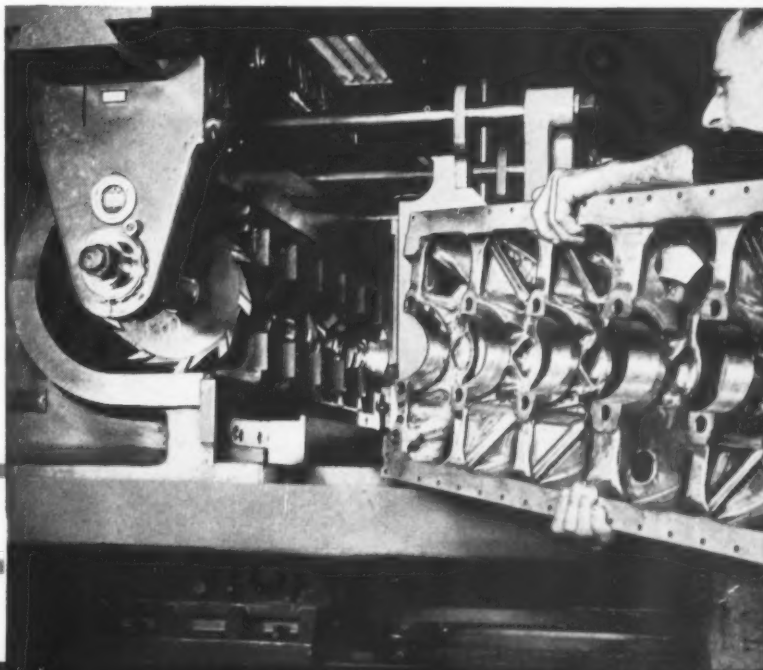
(Below) Milling Machine Employed for the Simultaneous Finishing of the Bearing Diameters and Faces of Crankcases
